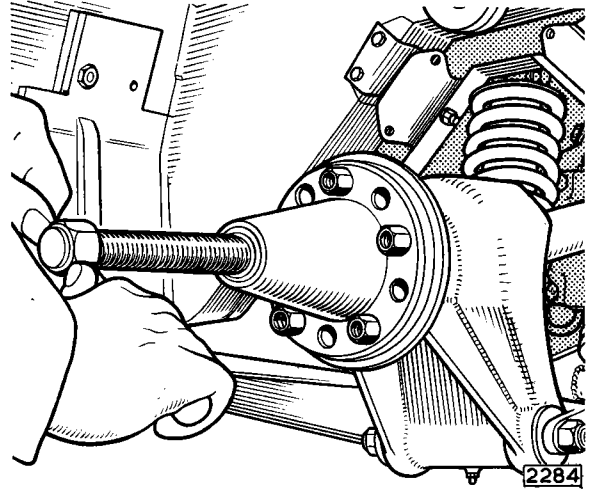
Removing the rear hub with the extractor (Churchill Tool No. JD. 1 C)
